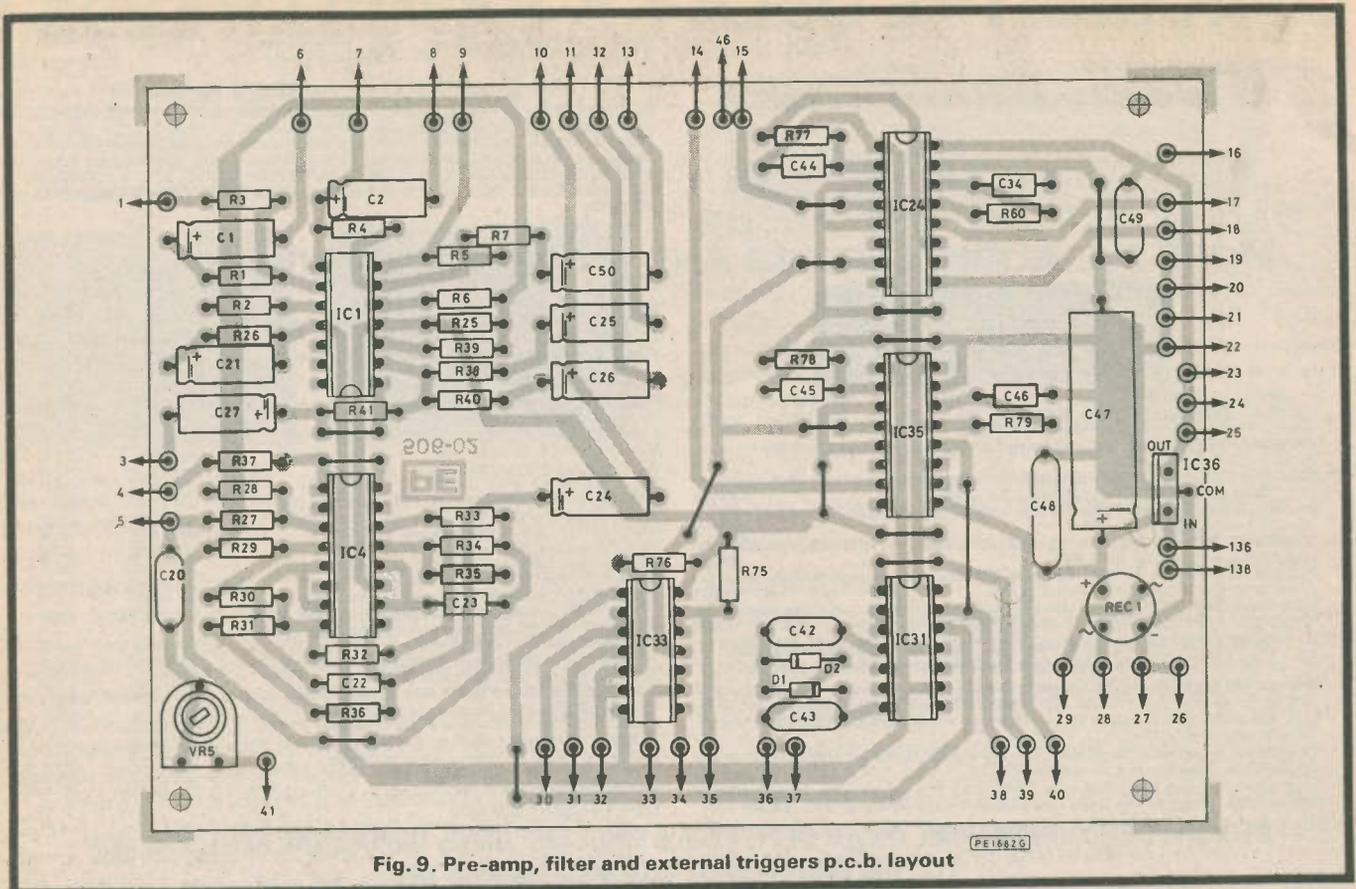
Pre-amp, filter and external triggers p.c.b. layout
